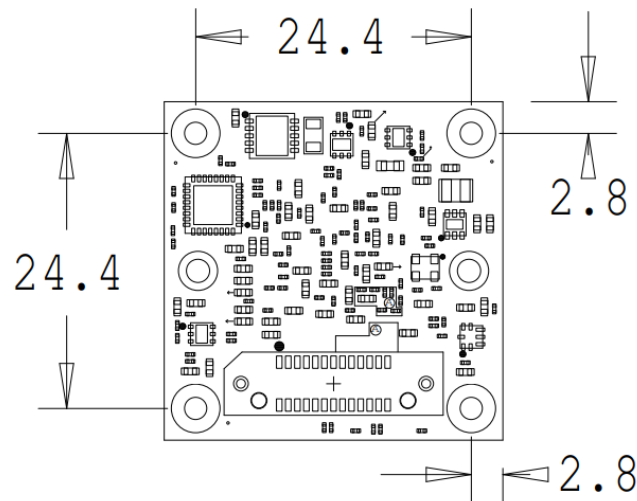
Bottom View of e-CAM521_CUMI568C_MOD_H01R1 Mechanical Drawing (Mirrored)
